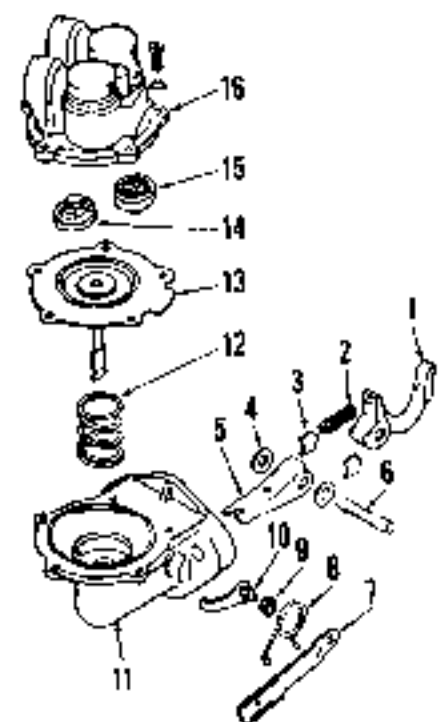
Exploded view of fuel lift pump. Check valves (14 and 15) are available only with cover (16).
